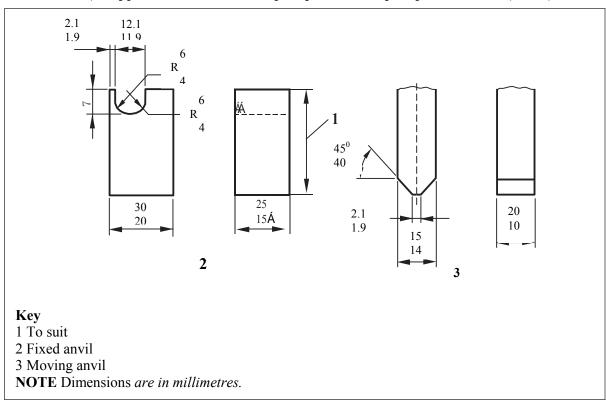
Apparatus for tests on adaptor plug pins: Details of anvils (see 12)
